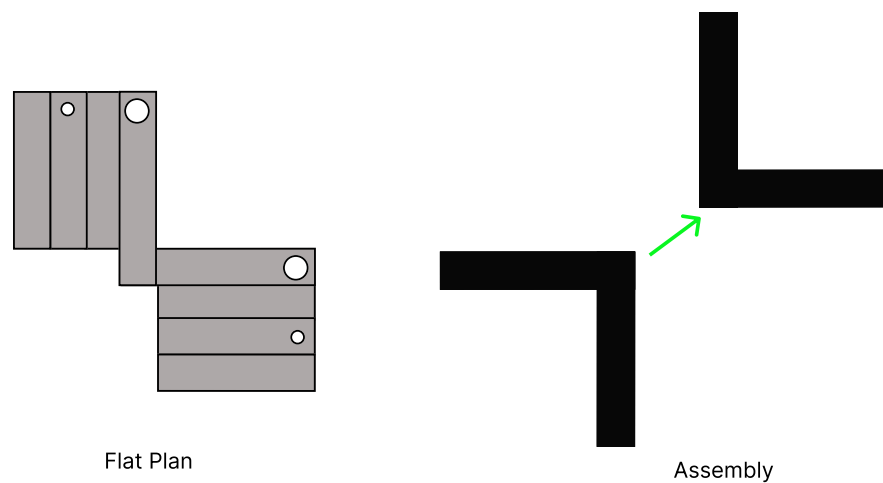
An example of the flat assembly and two of the flat assemblies being combined to form a single quadcopter frame.
